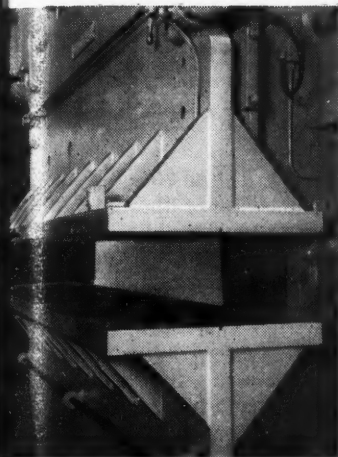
"Pouring off" remelted high speed steel into ingots.
